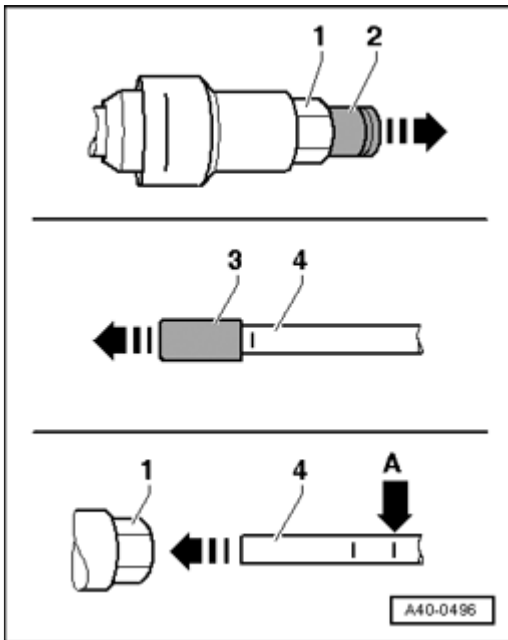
Identifying Transportation Caps, Air Line, Safety Devices, And Connecting Piece
